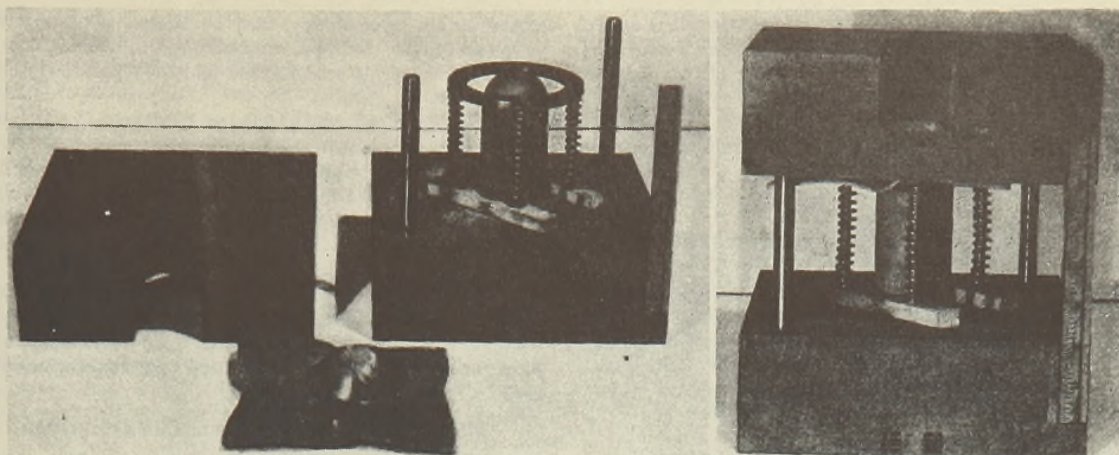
Parts of Drawing Mandrel (left) and Assembled (right)
